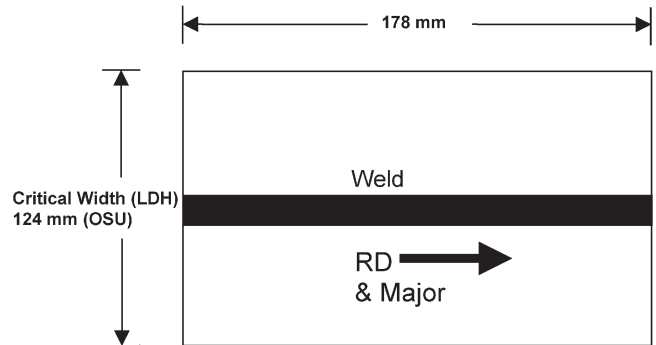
Specimen used for LDH and OSU tests, with the weld and the rolling direction along the major axis of the specimen.
